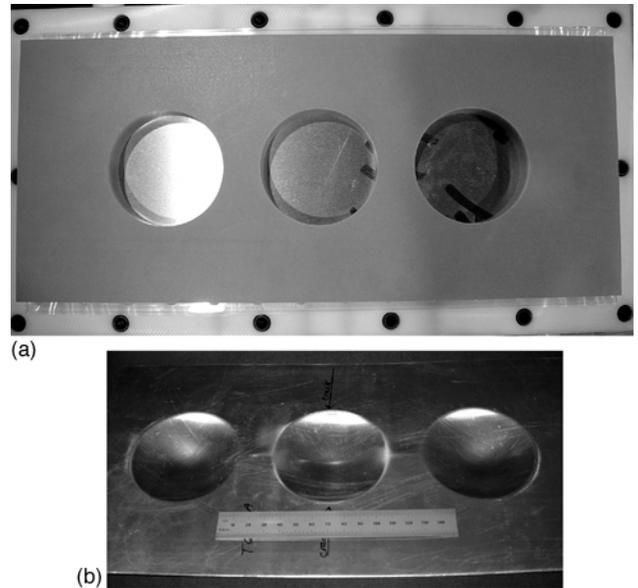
(a) Top view of the glass-fiber-reinforced plastic tooling on the coil assembly with aluminum sheet metal between the coil and the tool. (b) Photograph of the deformed sheet after one EM pulse through coil.
